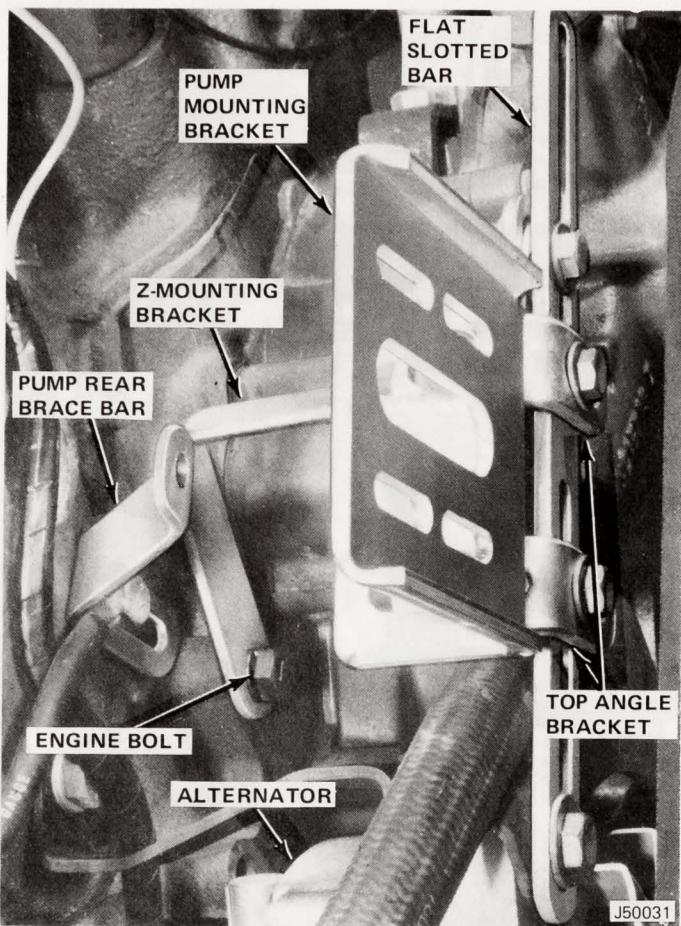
Pump Support Bracket Installation—Eight-Cylinder
